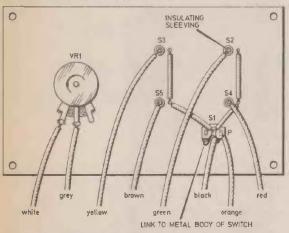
Front Panel wiring. Note that one pin of each pushbutton switch is fitted with an insulating sleeve.
